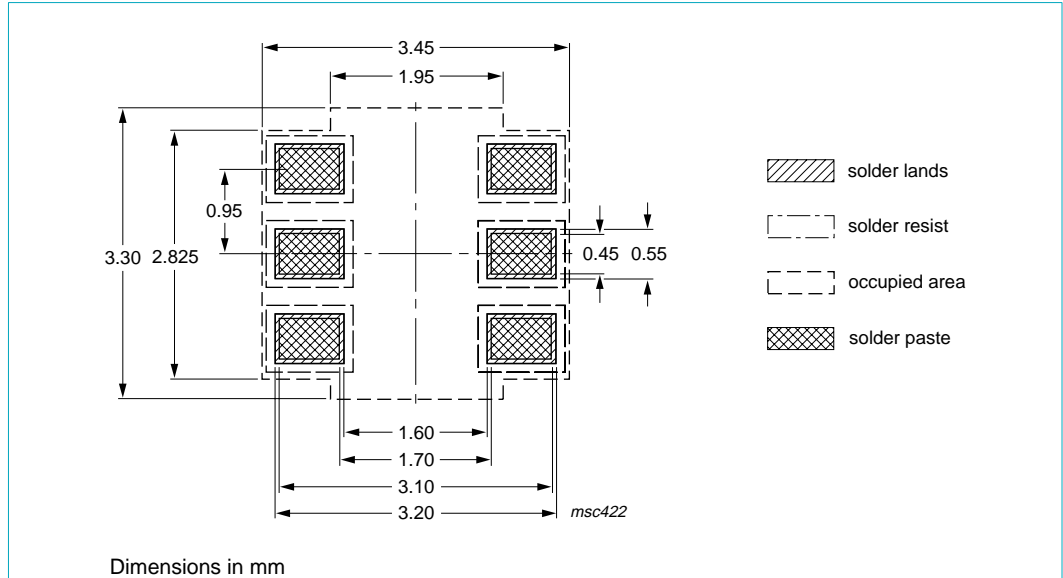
Reflow soldering footprint SOT457 (SC-74)
